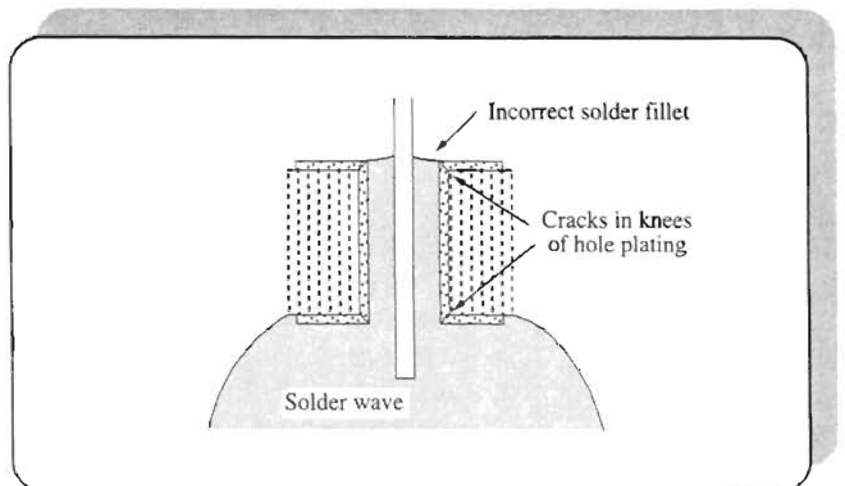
Cracks in the knees of plated through-holes may prevent solder flowing out of the top of a hole
